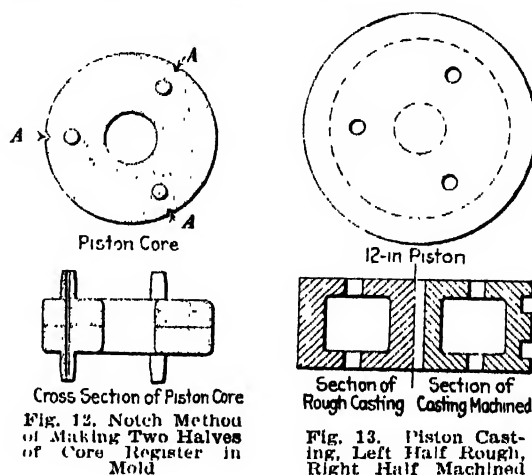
Notch Method of Making Two Halves of Core Register in Mold
